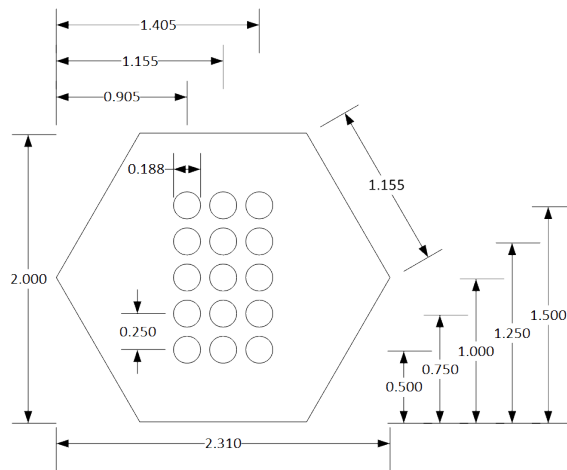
Dimensional drawing (top view) for  $\frac{3}{16}$ -inch holes for thermocouples in  $1\frac{1}{2}$ -inch male NPT hex head plug.
